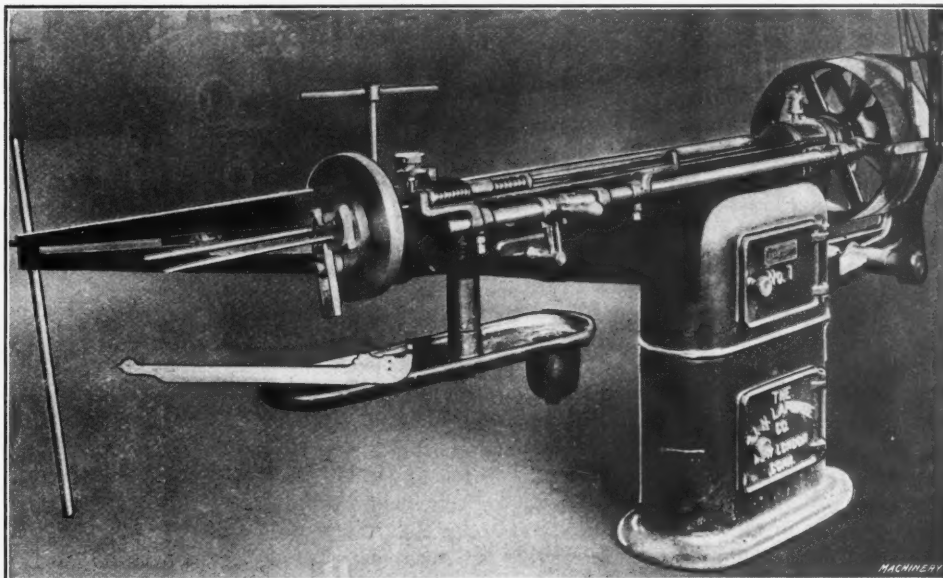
J. N. Lapointe Broaching Machine fitted for broaching Scale Parts
